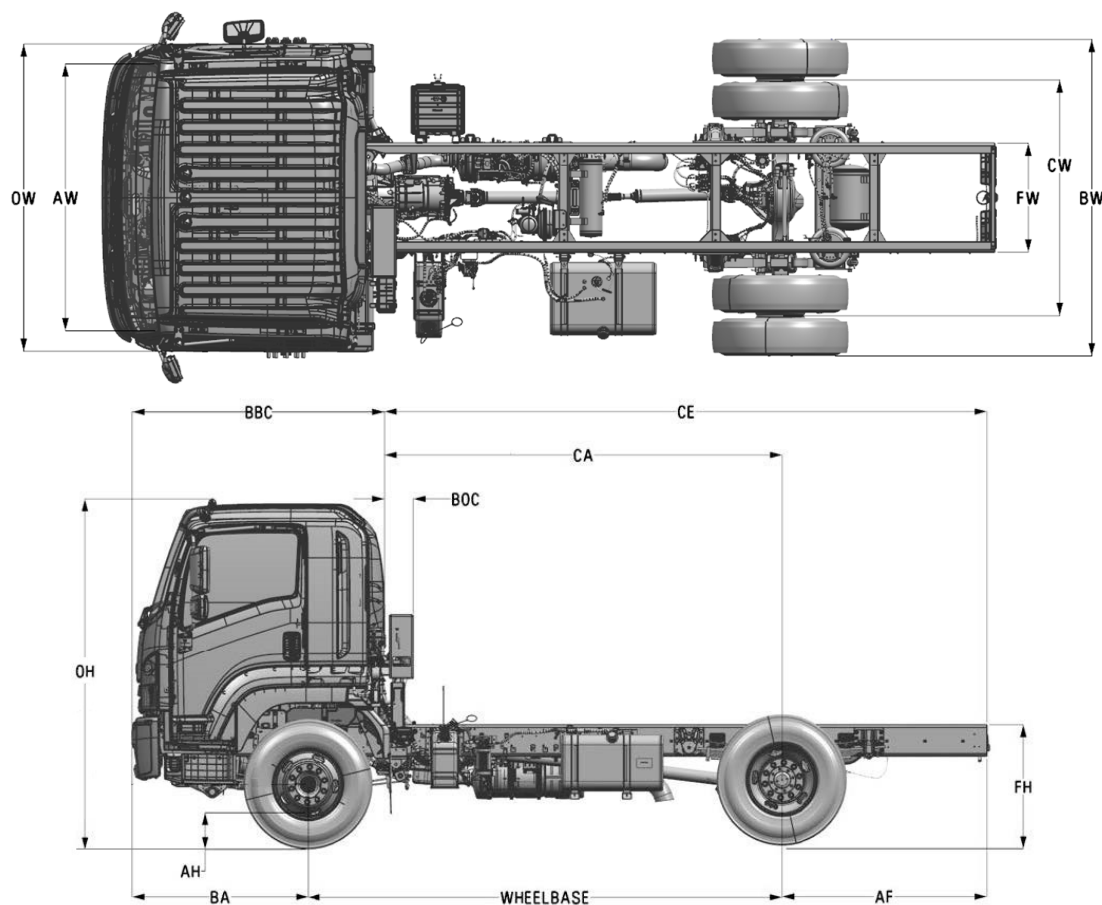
F-Series Diesel Cab Chassis Dimensions (air suspension pictured)
